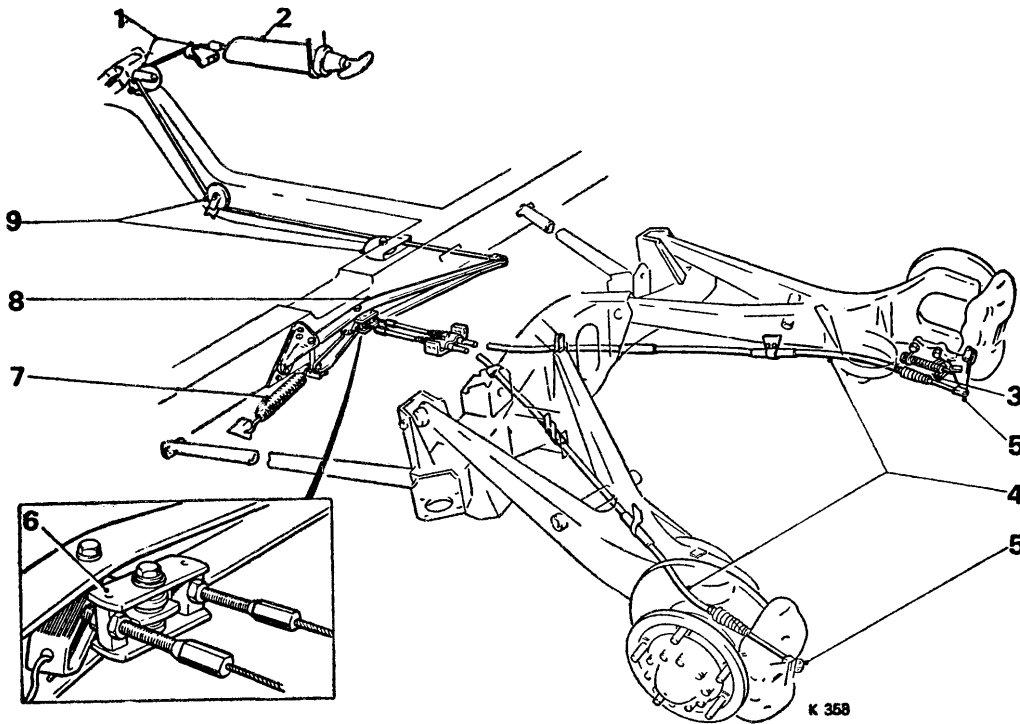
HAND BRAKE LINKAGE—LATE R.H.D. CARS
